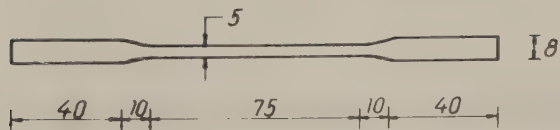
Dimensions of tensile test pieces cut out at the welds.
